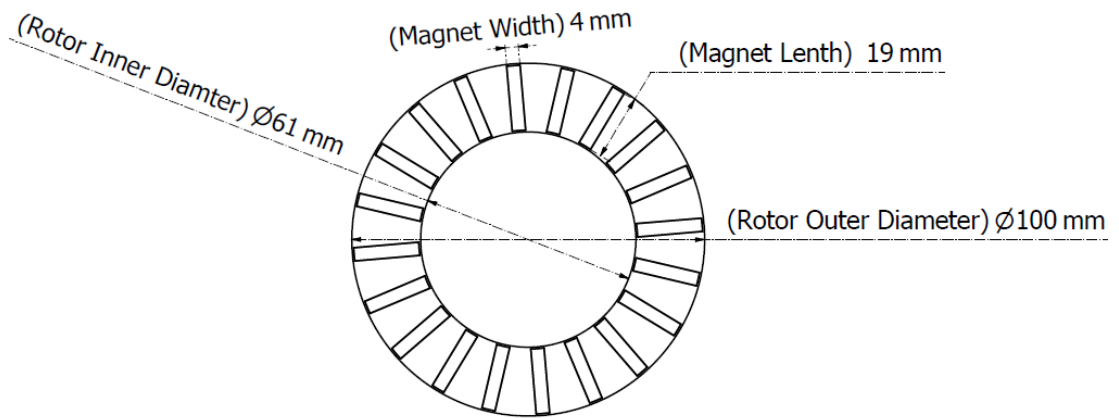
Rotor and Magnet Dimensions of the New Modified Flux Concentrated Split Tooth PM Machine.
